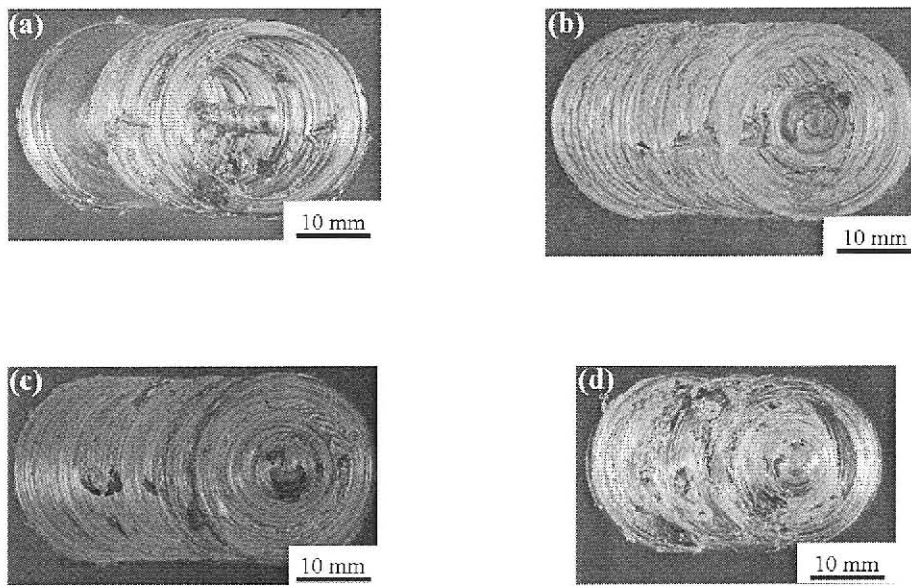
Appearance of stir-in-plate welded specimens: (a) 80rpm, 100mm/min, (b) 100rpm, 100mm/min, (c) 150rpm, 100mm/min and (d) 170rpm, 100mm/min.
